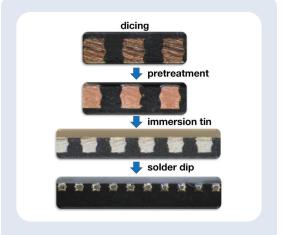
Open flanks after dicing, pretreatment, immersion, and protection and finally after solder dip.
